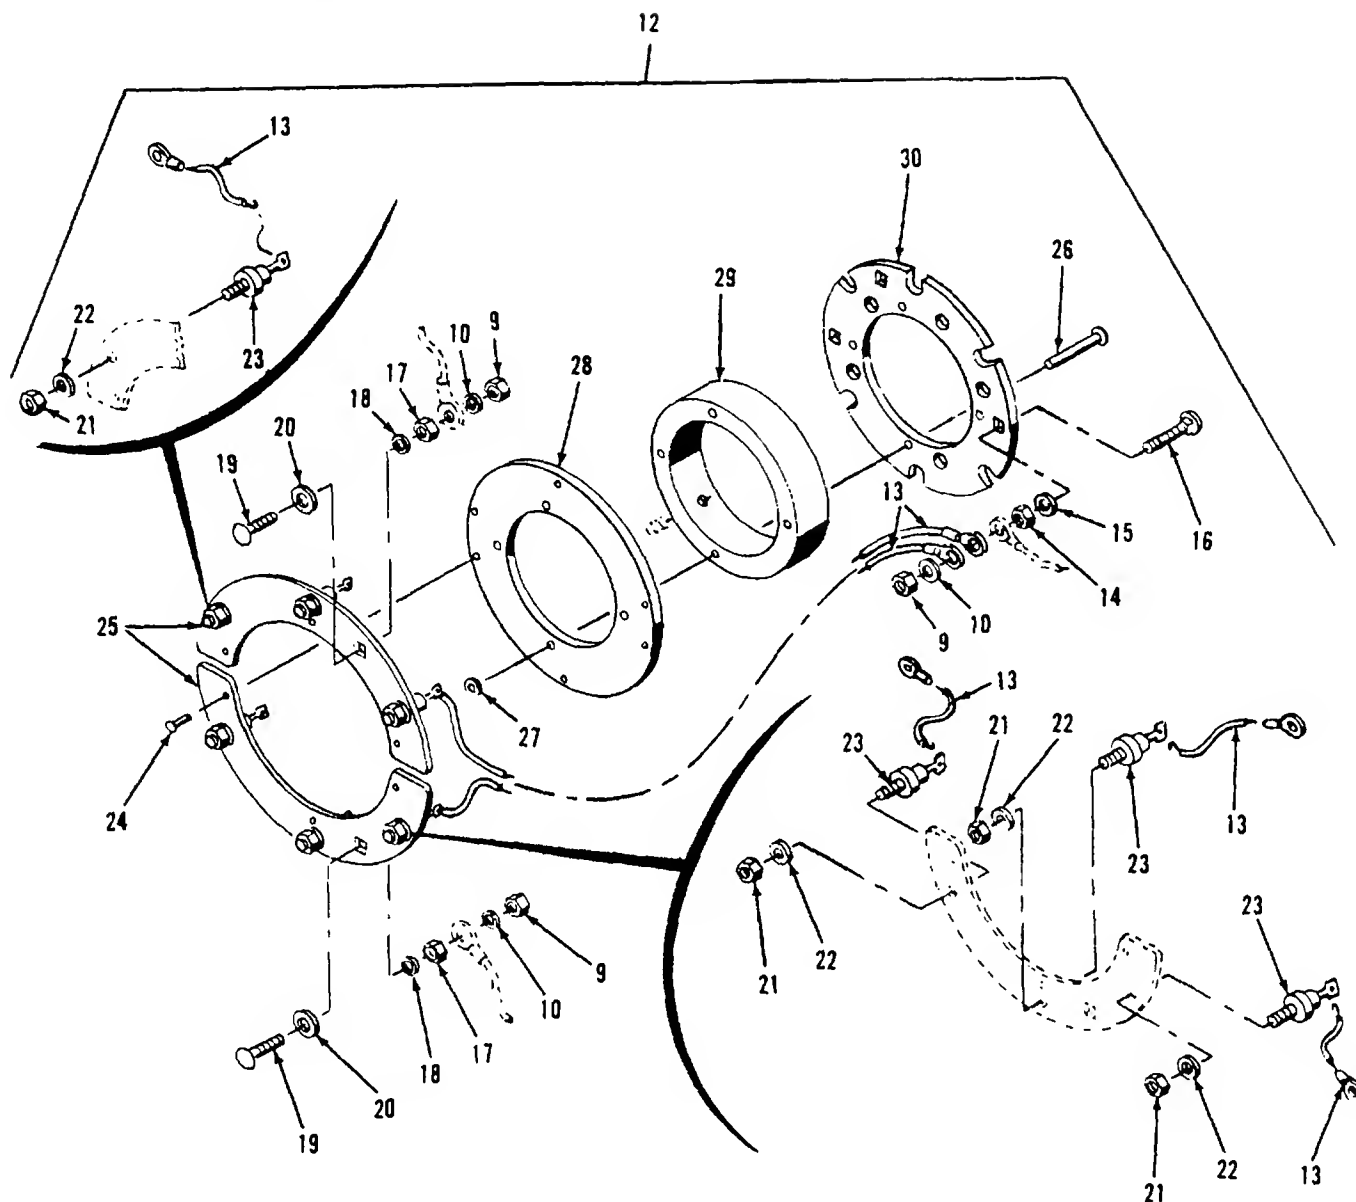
Generator Assembly G1, Exploded View (Sheet 1 of 2)
